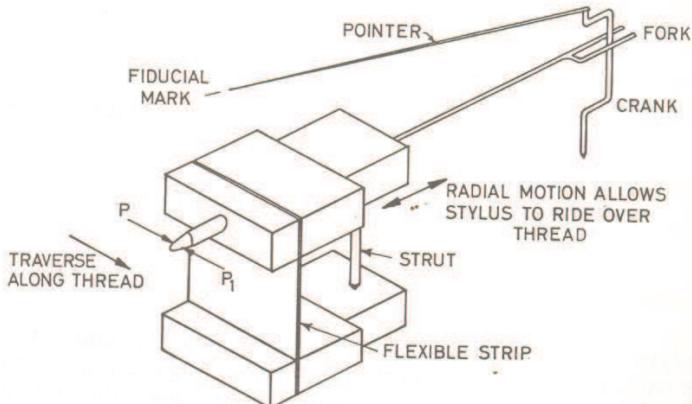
Fiducial indicator used on pitch-measuring machine.
